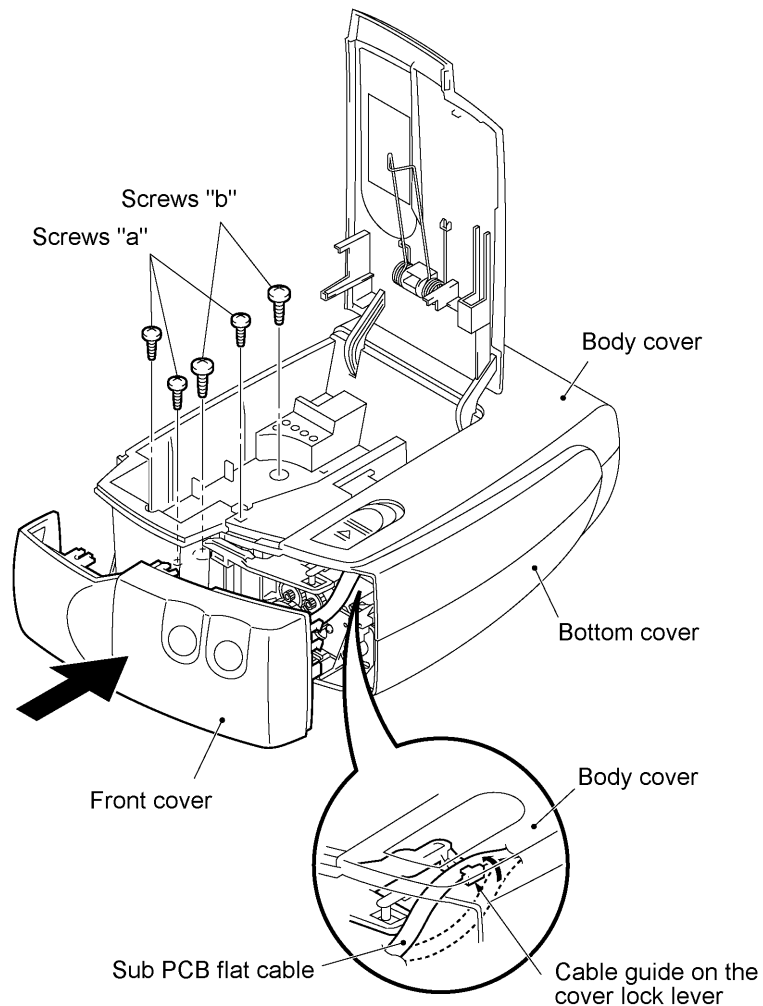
Routing the Sub PCB Flat Cable and Securing the Front Cover and Body Cover
